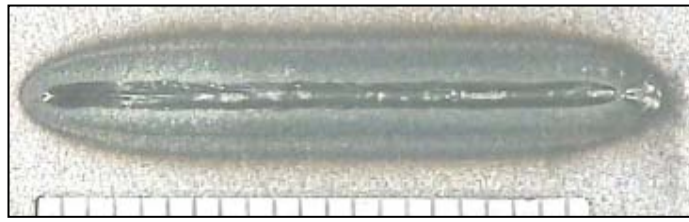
Top bead: made by remote fibre laser welding in an overlap joint, 1.2mm to 1.2mm DC05
